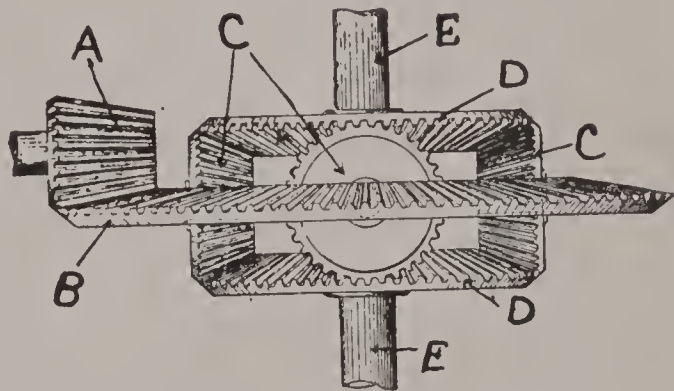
A—Driving Pinion; B—Driving Gear; C—Differential Pinions; D—Axle Gears.
